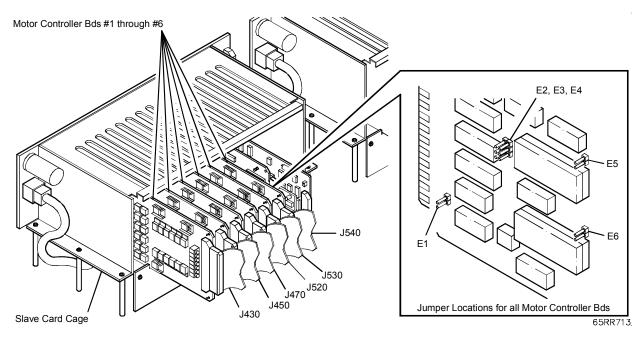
Motor Controller 2-19645-02 (Slave Card Cage)
